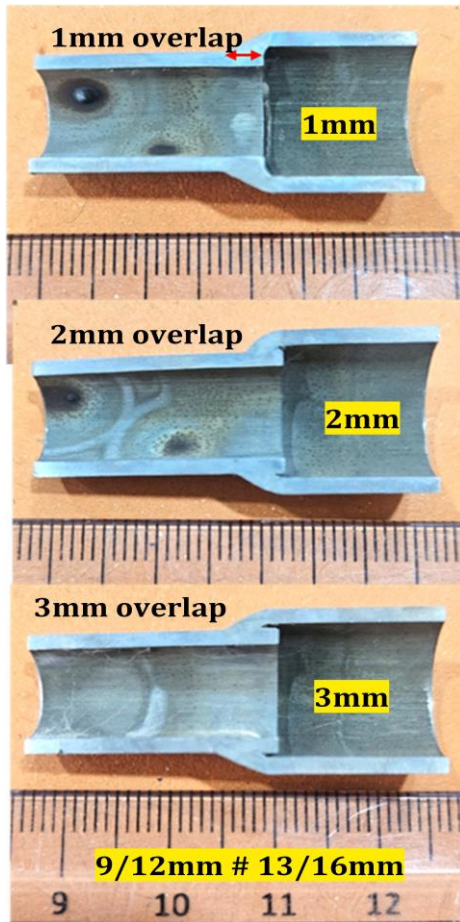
Macro-section of 9/12mm # 13/16 mm welded samples
